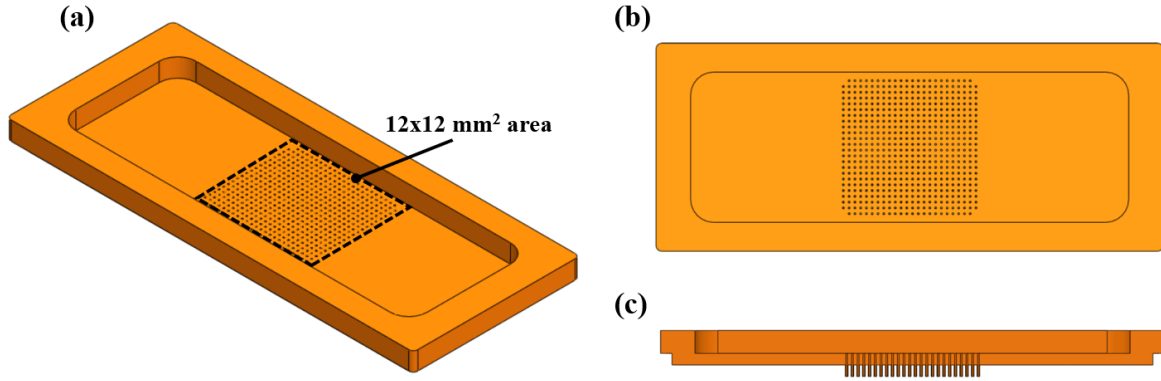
(a) Isometric view of the copper manifold CAD model. (b) Top view of the copper manifold CAD model. (c) Lateral cross-section of the copper manifold CAD model.
